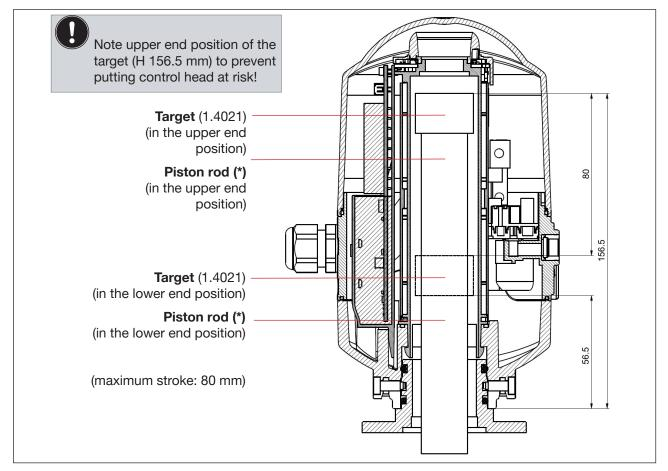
Sectional view of control head and piston with target (in upper and lower end position)
